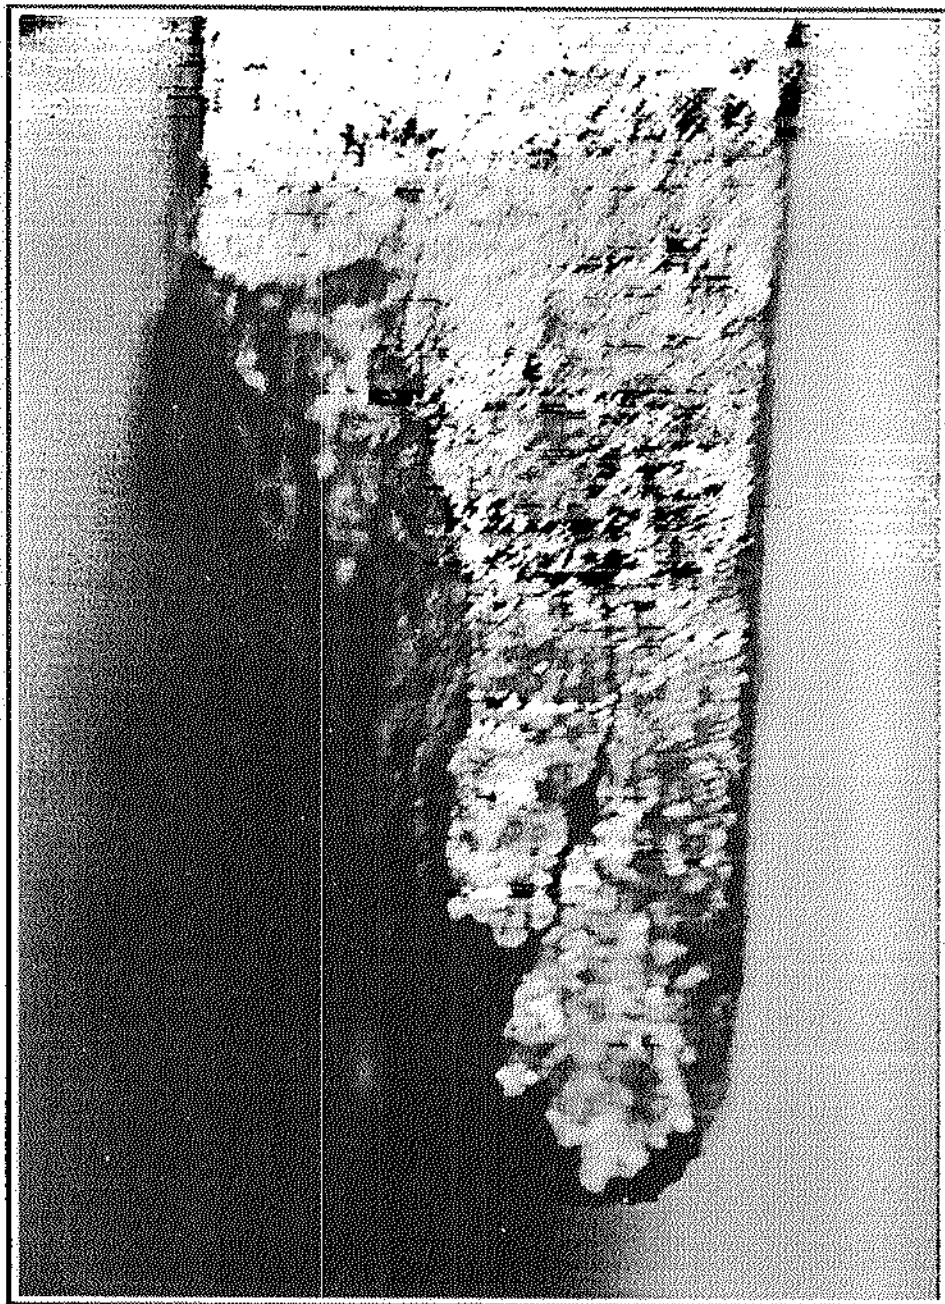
Complete fracture of the specimen due to SCC after 576 hours of exposure to the solution (15X)
